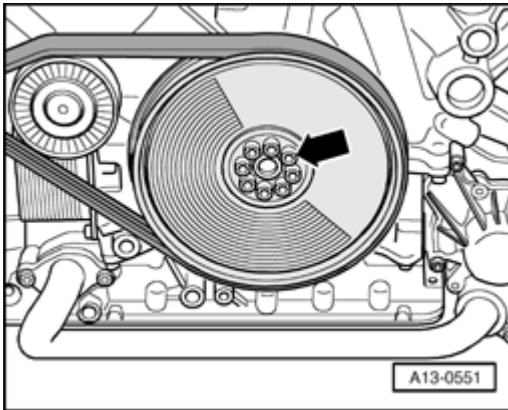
Loosening Mounting Bolts On Vibration Damper Few Turns
